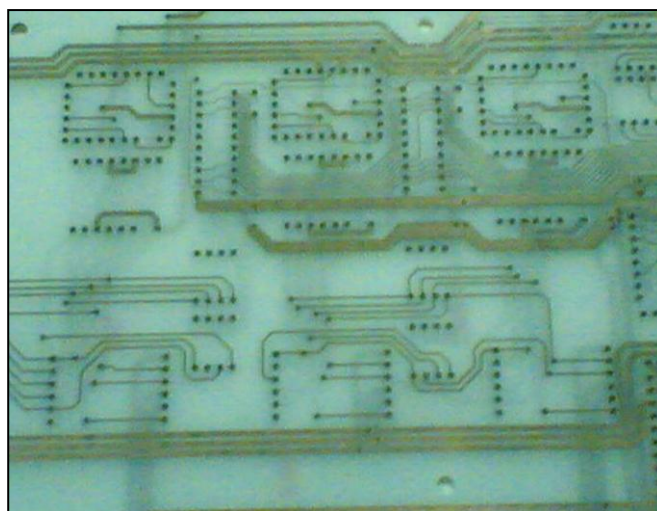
Bed plate made of polymeric material after making the required drawings and perforation.
